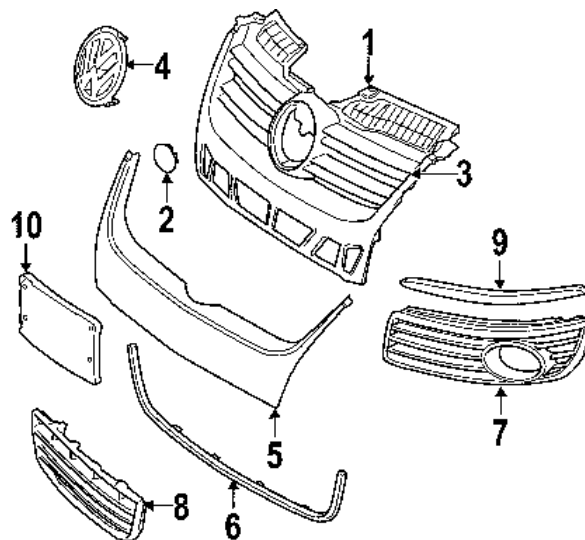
An example of an assembly drawing used in the replacement of car parts (see Chapter 9)
